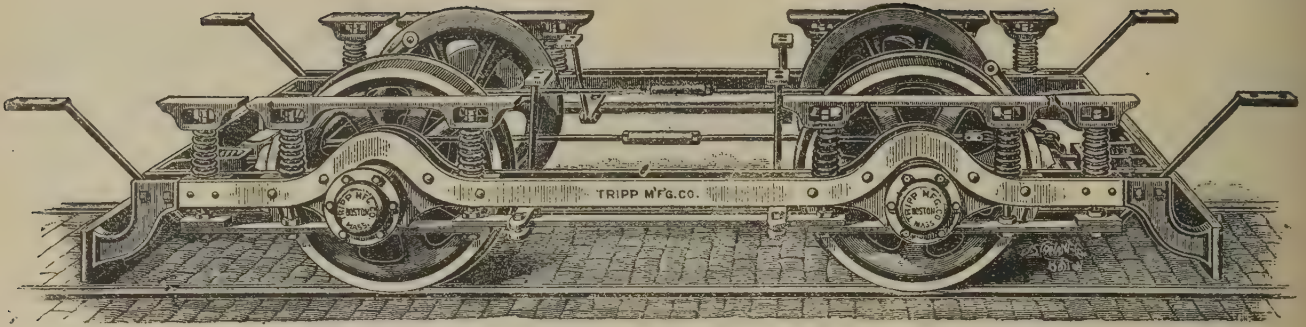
TRIPP ELECTRIC TRUCK WITH ROLLER BEARINGS.
